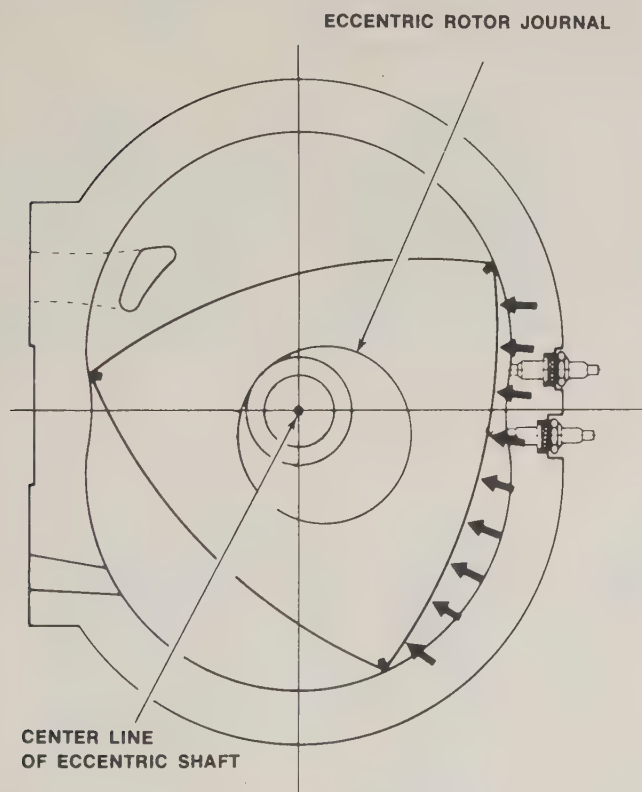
How the combustion pressure, acting off-center on the eccentric of the eccentric shaft, forces the shaft to rotate. (Toyo Kogyo Company, Ltd.)
